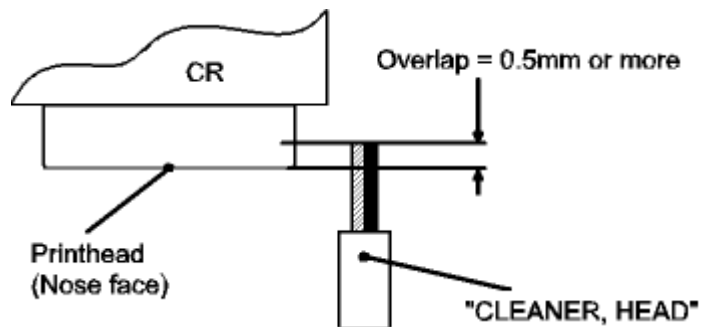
Overlap of Head Surface and the Cleaner Blade
